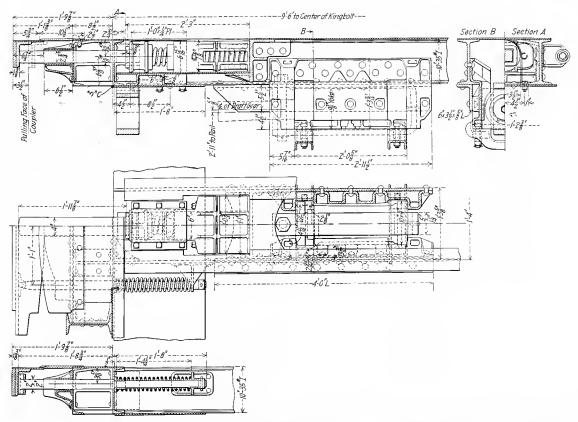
Miner Friction Draft Gear and Friction Buffer for St. Louis & San Francisco Non-Vestibule Passenger Train Cars. W. H. Miner.
